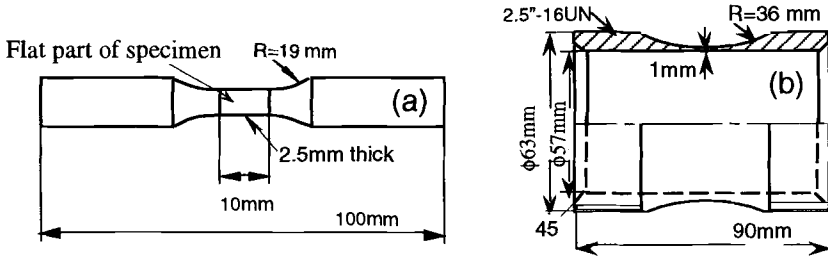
Uniaxial Plate Specimen, and b) Biaxial Tubular Specimen
